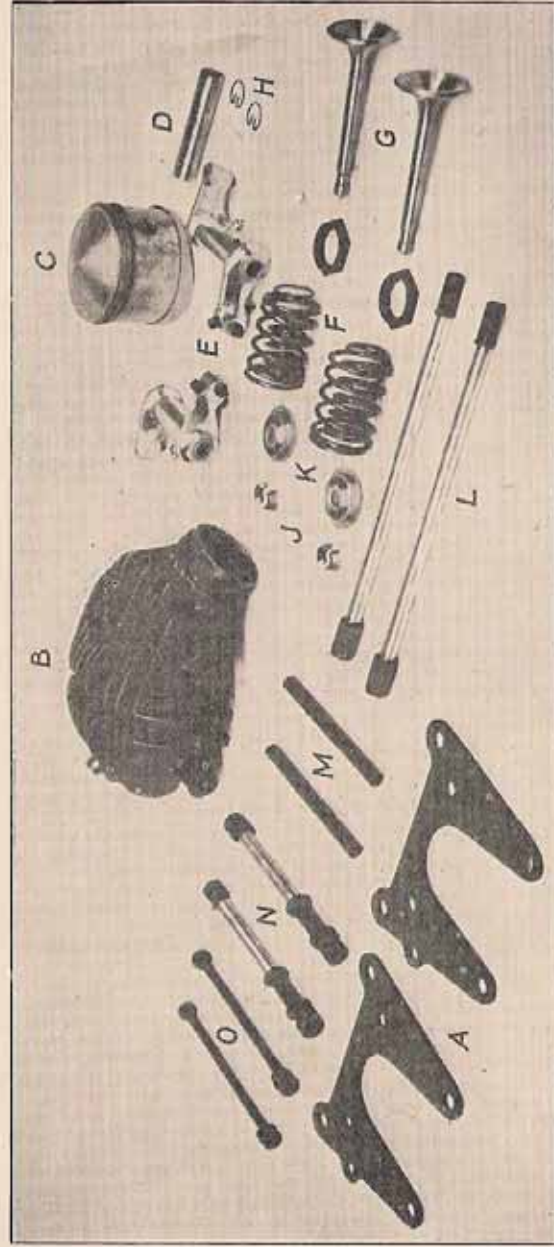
COMPONENT PARTS OF OVERHEAD VALVE MECHANISM OF THE 3-49 H.P. AND 4-98 H.P. MODELS
